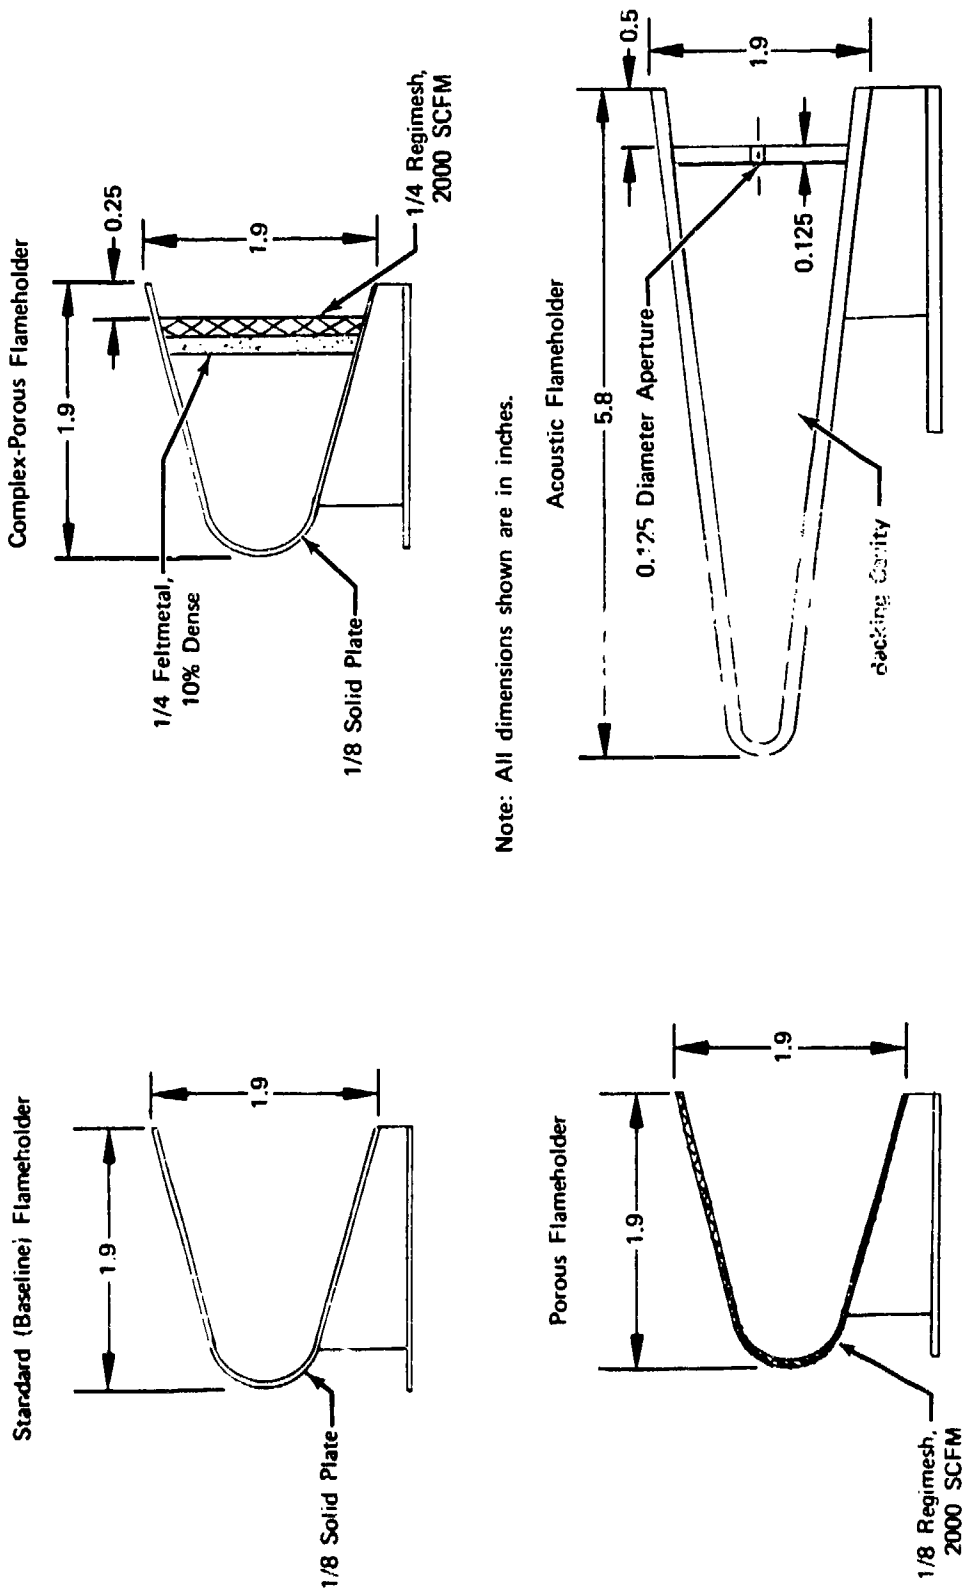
Design Sketches of Flameholders Fabricated for Testing in Augmentor Simulator
